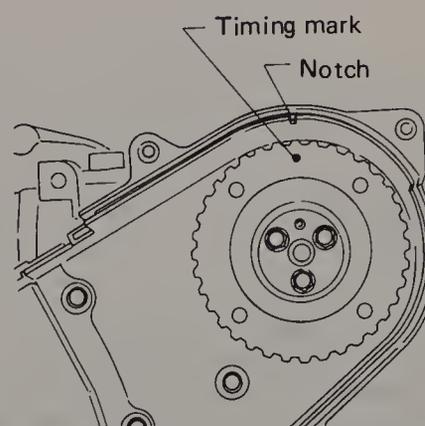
Align the mark on the camshaft sprocket with the notch in the belt cover (Sec 4)
